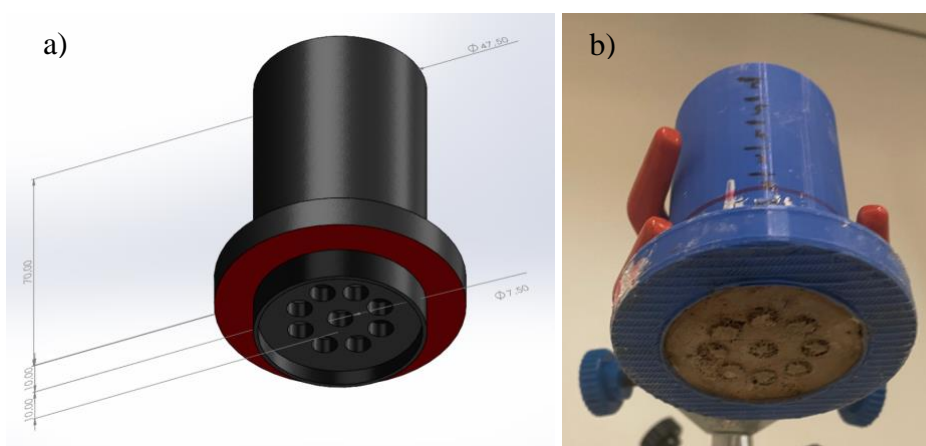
a) Prototype design modeled using SolidWorks software; b) Final prototype after 3D printing, filled with the target material.
